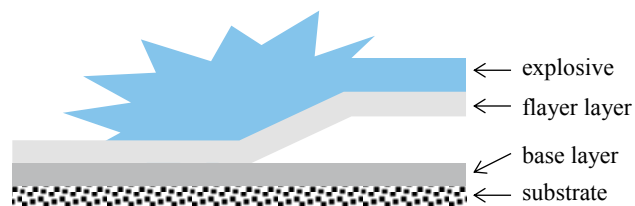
Scheme of explosive welding with longitudinal layer configuration.
